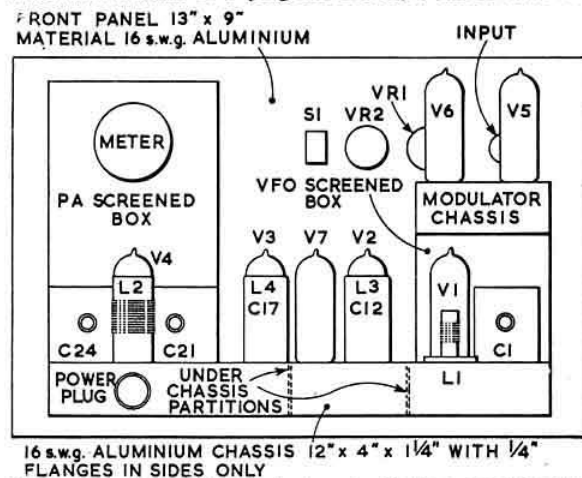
Rear view of the chassis layout with the screening covers removed.
